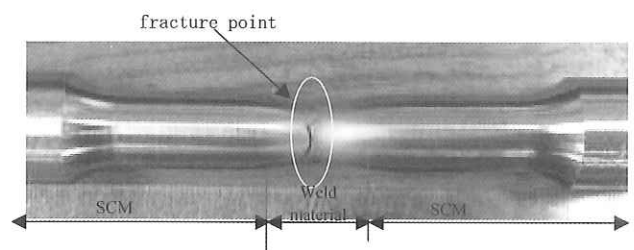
Macrostructure of weld section (690N/mm² class high tensile steel)
